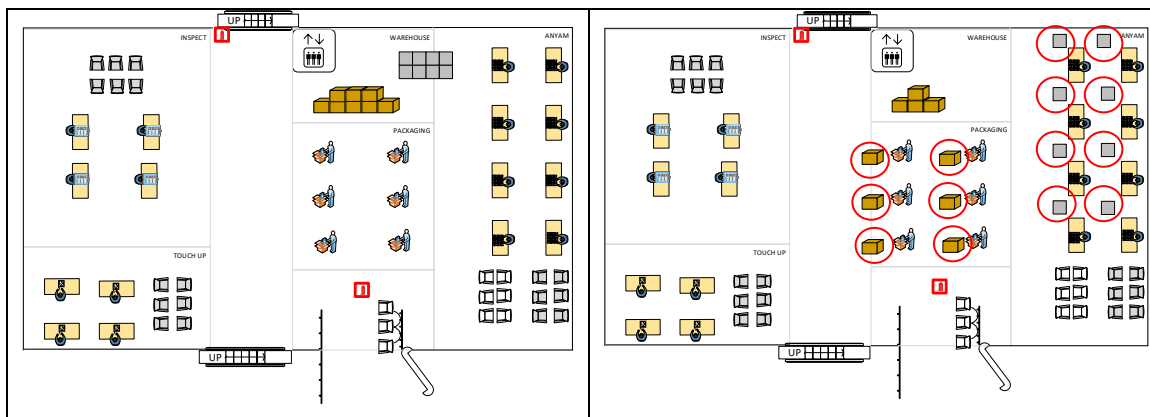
Current (left) and Proposed (layout) Layout Floor 2
